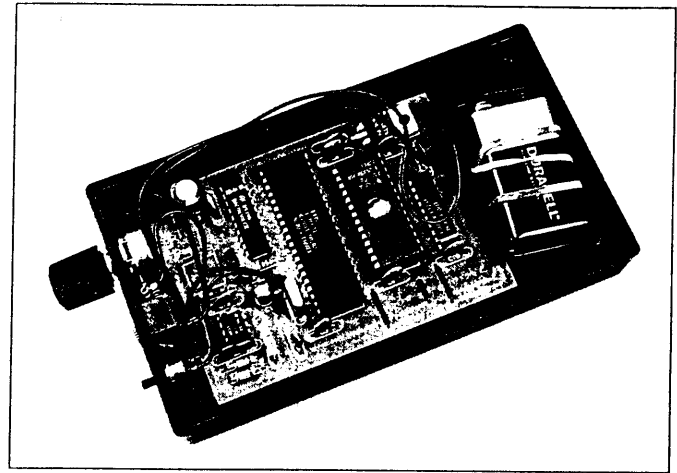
In this PC-board version of the CPC, everything is readily accessible. Double-stick adhesive tape can be used to hold the battery in place. The Serpac 051-1 enclosure measures approximately 1x3x5½ inches (HWD).
